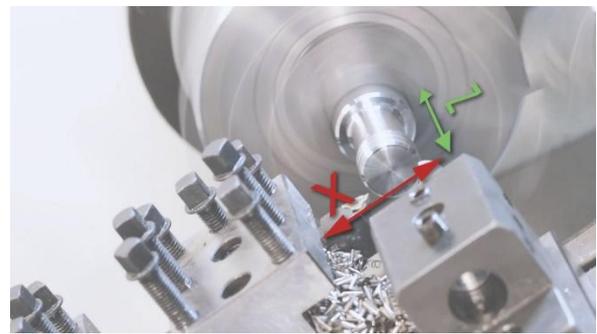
Two-axis lathe; X and Z translational axes [3]
